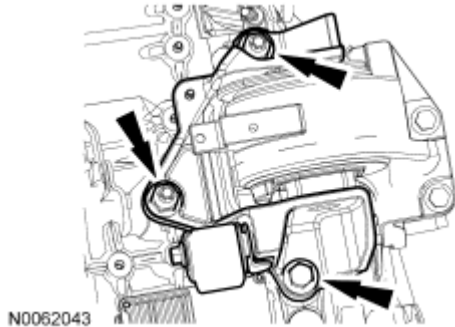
Identifying Transaxle Mount Bracket Bolt
